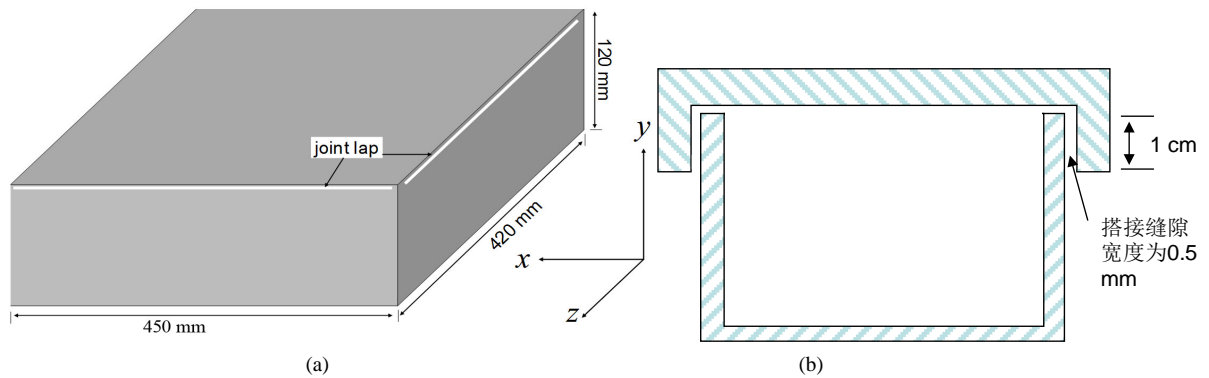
The equipment enclosure model and joint lap location; (a) equipment enclosure size and the joint lap location; (b) joint lap dimension
